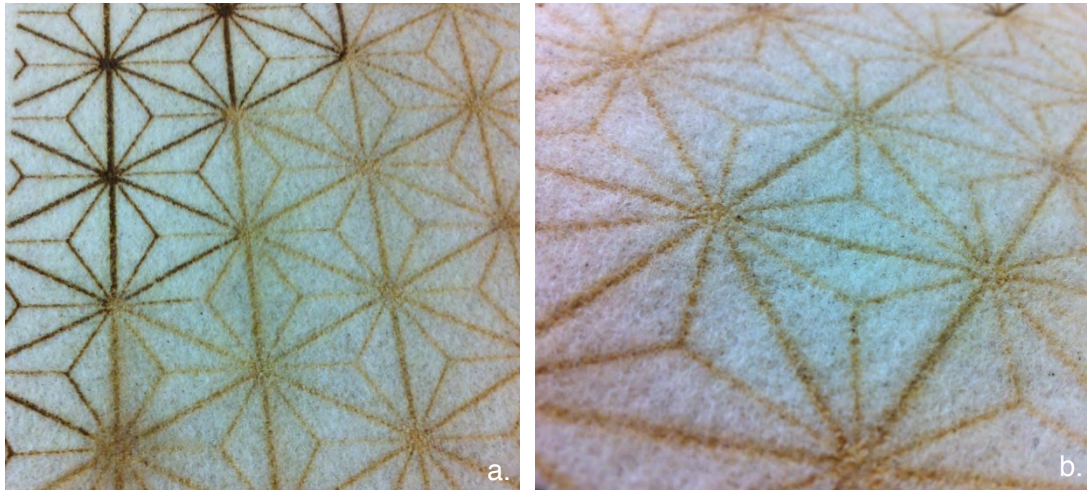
a) Removal of burnt debris of laser irradiated geometric pattern on milled wool. b) Close up detail shows brown carbon staining after debris removed.
